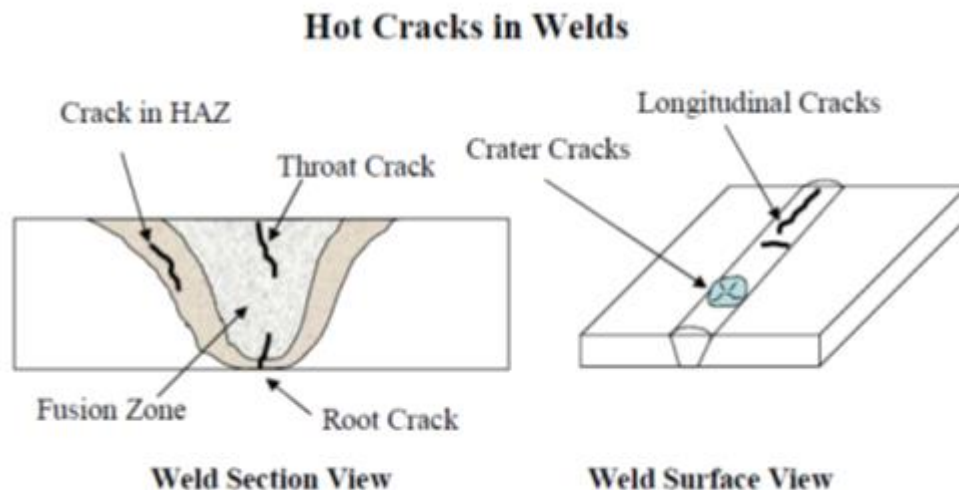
Schematic showing location of typical hot cracks in weld
